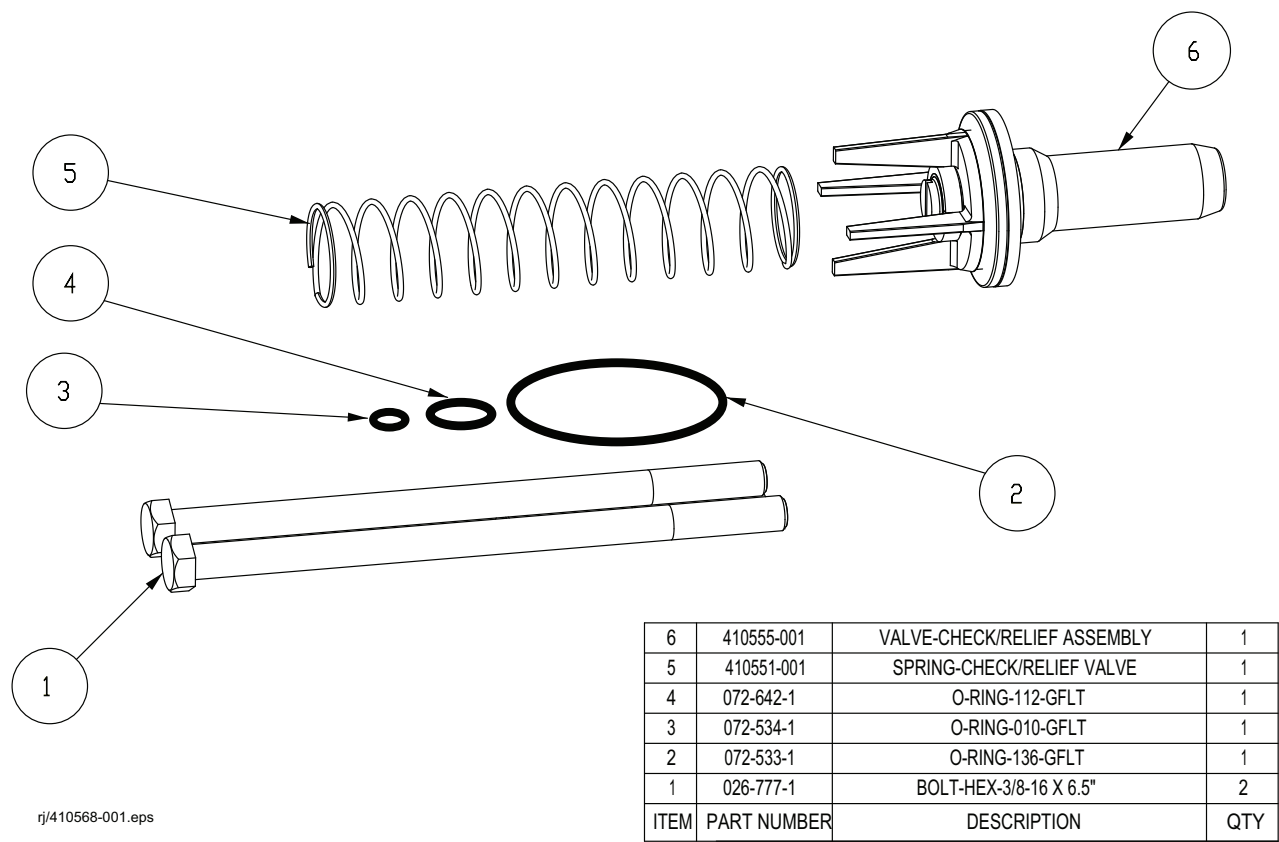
Service Kit 410568-001 Check/Relief Valve (Pressure Relief Version), Spring, Fasteners, Seals
